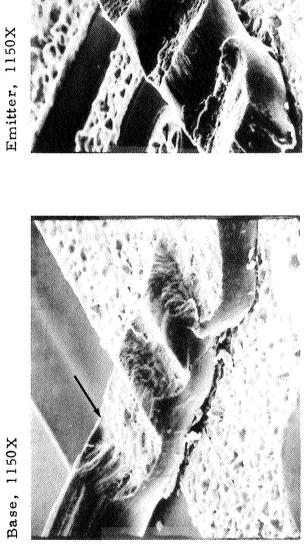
Manufacturer "B" 2N2222A, Serial Number 74, Die Side Bond, Ultrasonic. No Evidence of Microcracks at The Heel After 16, 200 Power Cycles
